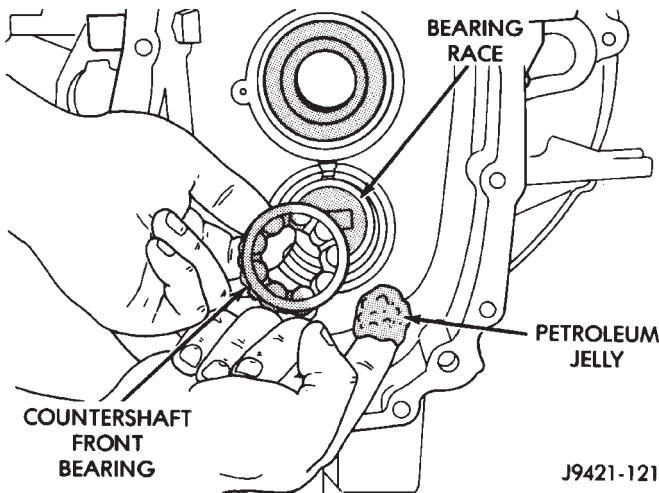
Lubricating/Positioning Countershaft Front Bearing
